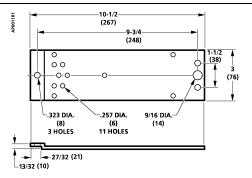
Extended Shaft Mounting Bracket Dimensions.
